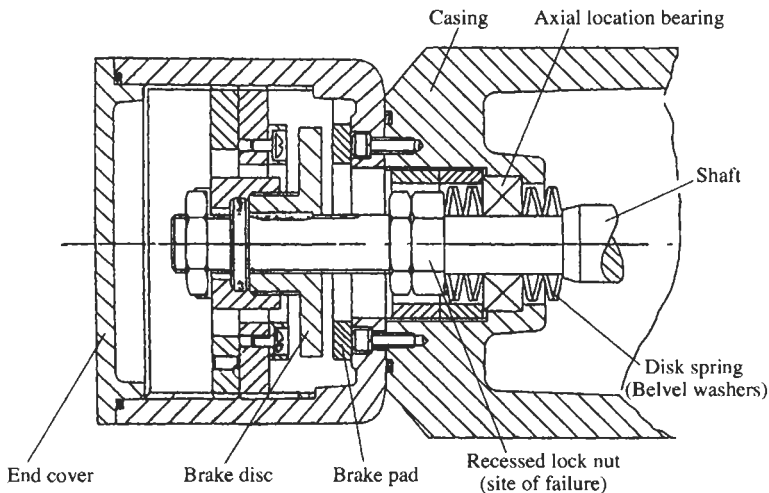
Diagram of the modification made to the Rotork NABT 4 valve actuator, incorporating in particular the brake disc. The Belvel washer disc spring, locking nuts and axial location bearing are clearly apparent.
